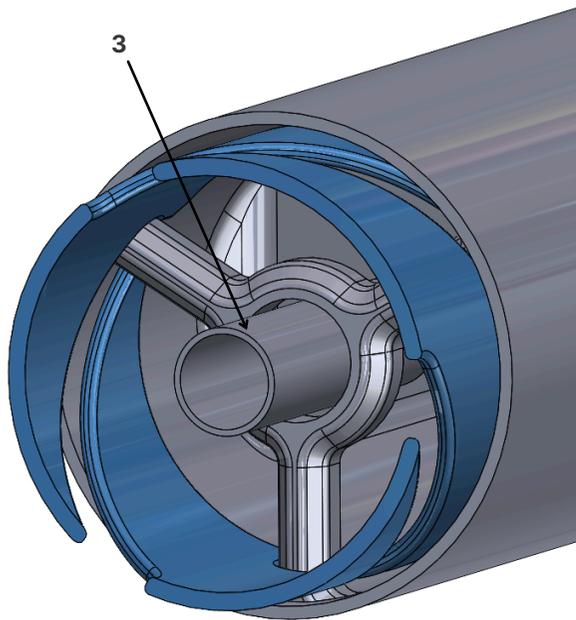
Partial cross section; the three-pointed star-shape following the helical path (valve is not shown in this picture for clarity).
